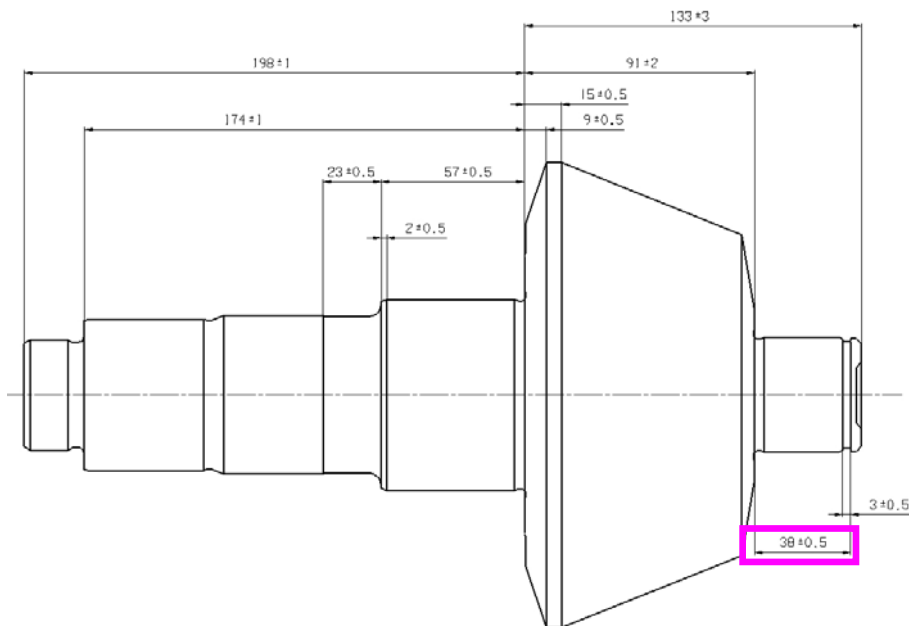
Position of a retaining ring groove is indicated on a pinion drawing.
